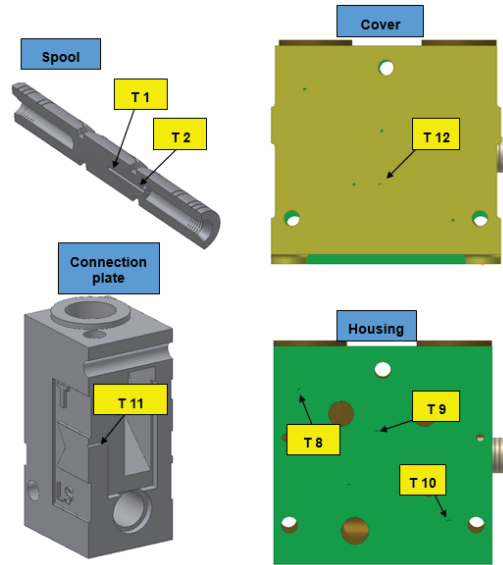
Arrangement of holes to install the thermocouples T1, T2, T8, T9, T10, T11, T12 in the elements of proportional spool valve model: spool, connection plate, cover and housing
